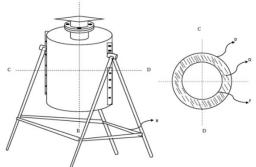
Schematics layout of the pyrolyzer Fig.1b. Whole view of a pyrolyzer with a rig Keys G- Heating element wrap M- Lower inlet A- Bolt H- Locking valve N- 2000W Body spiral heater B- Top screw lock I-Outlet tube O- 500W Bottom circular heater C- Top screw lock flange J- Reducer tube P- Bottom cover plate D- Outer body cover E- Lower screw lock flange K-Connector Q- Fabre glass insulator L- Main outlet tube F- Main reactor tube Sorting Rig construction Dimensional Metal scraps measurements K-type Insulation Heating Heating element Outer body Thermometer installation element wrap cover assembly probe <u>installatio</u>n Top cover with Main outlet tube Condenser screw lock leading to a installation construction condenser
